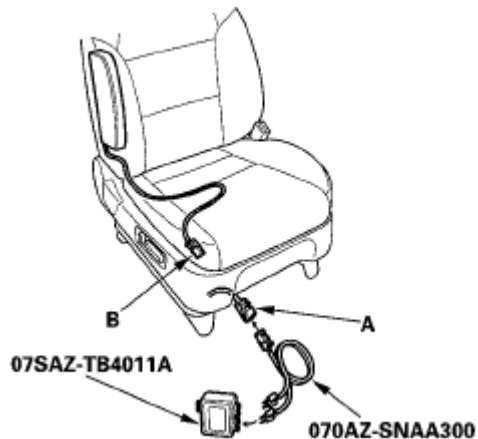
Identifying Floor Wire Harness 2P Connector And Front Passenger's Side Airbag
